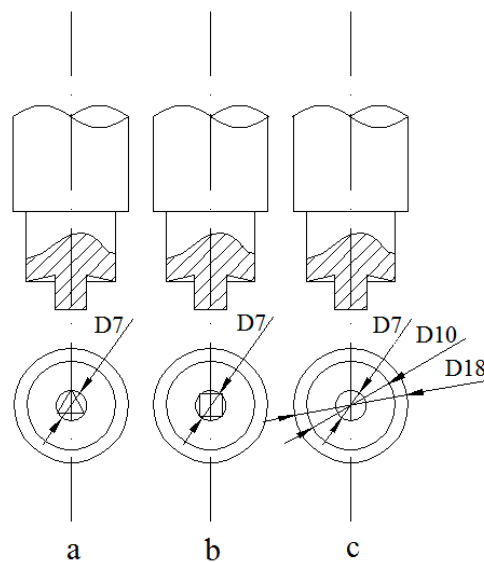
Probe geometries of tools employed. (a)Triangular (b)Square (c)Cylindrical .
